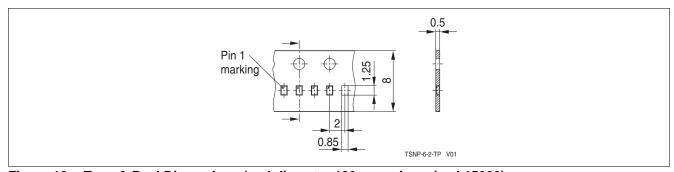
Tape & Reel Dimensions (reel diameter 180 mm, pieces/reel 15000)
